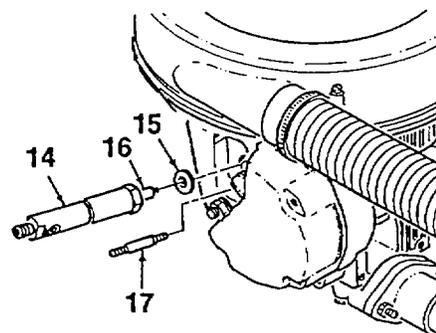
Fuel Injector (Sheet 2 of 2)
